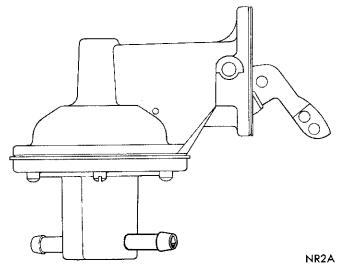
Fuel Pump Assembly (RD-267A) Optional 383 and 440 Cu. In. Engine
